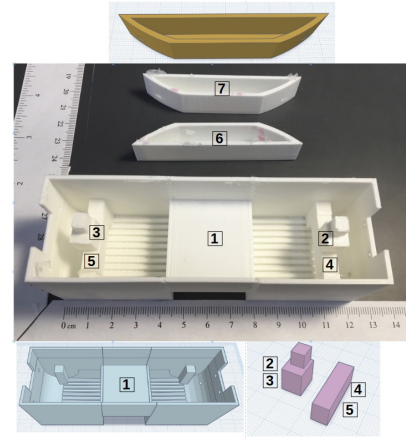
3D printed mold pieces. 1: Base of the mold. 2-5: Forming the hole of legs. 6-7: Shaping the central bridge of the body
